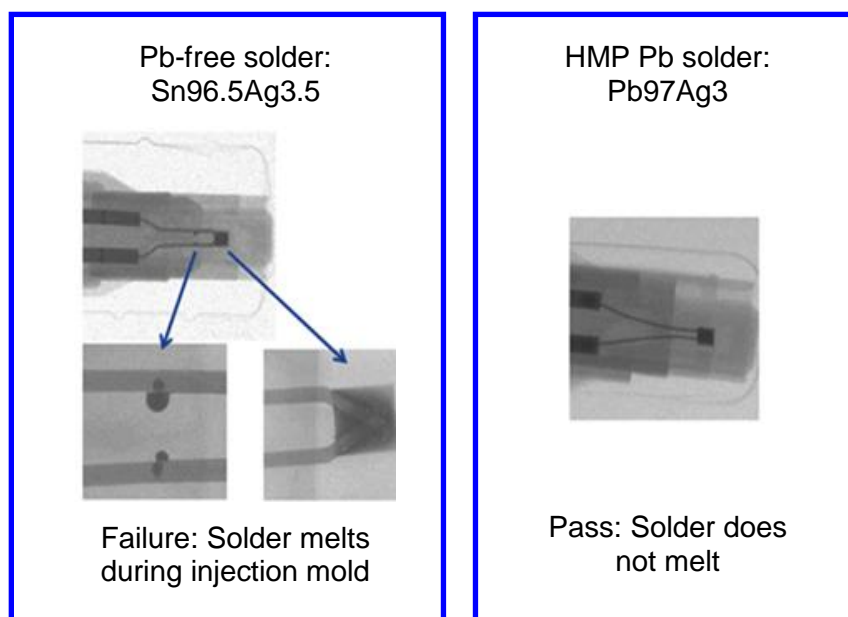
Thermistor Requirement for HMP Lead (Pb) Solder.
